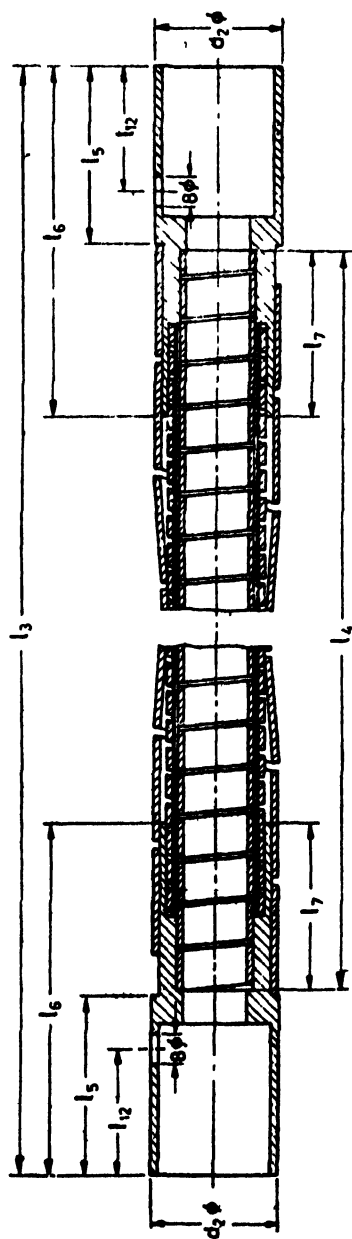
FLEXIBLE SHAFT ASSEMBLY
